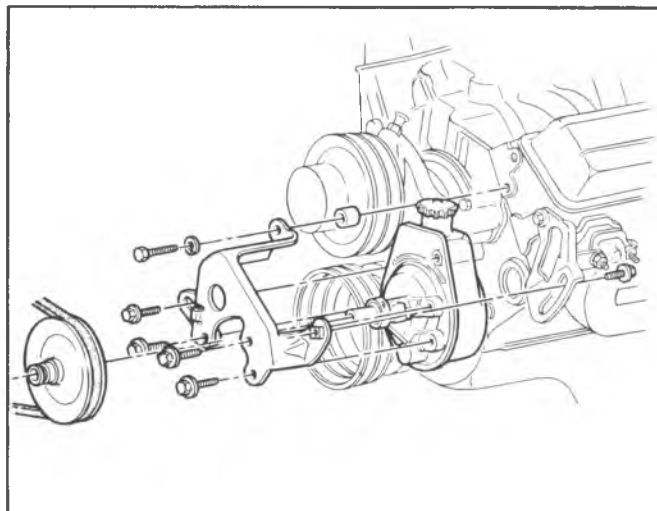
B3-24--P/S Pump Mounting; P200, P300 (42)
